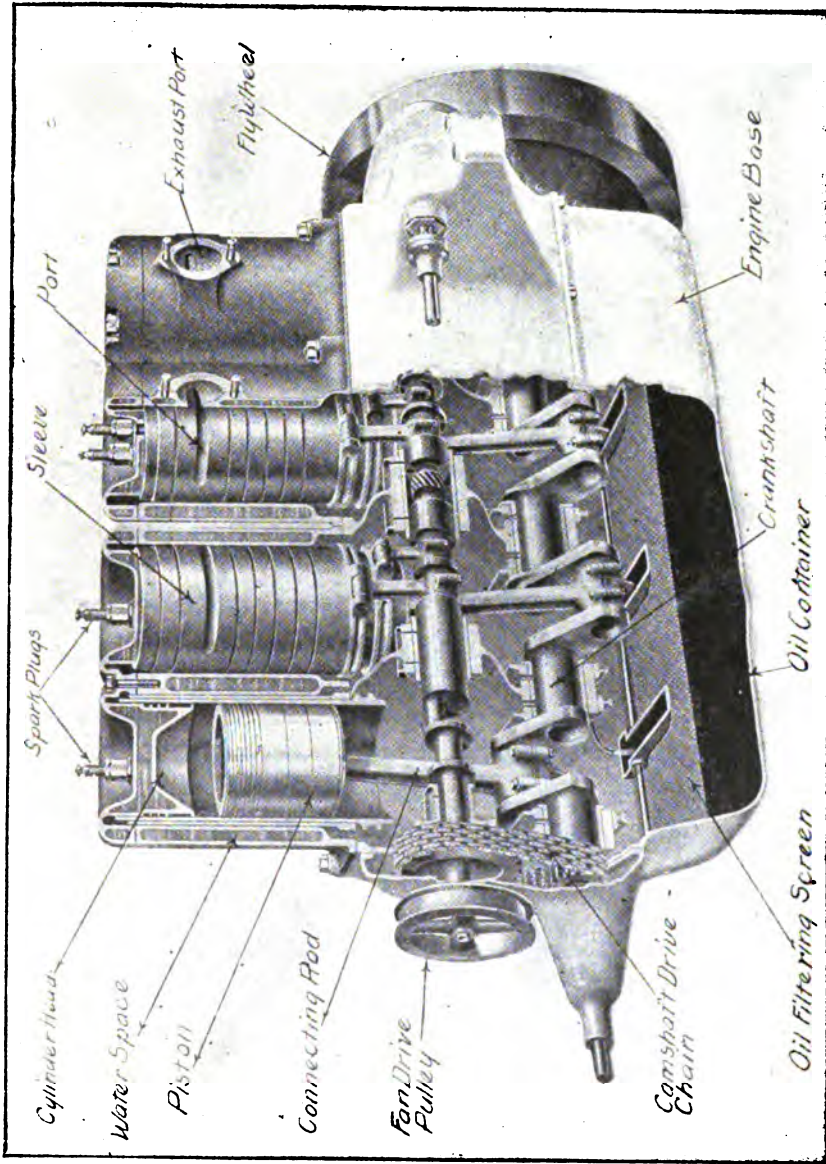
Partial side sectional view of Knight sleeve valve engine, showing interior mechanism.
